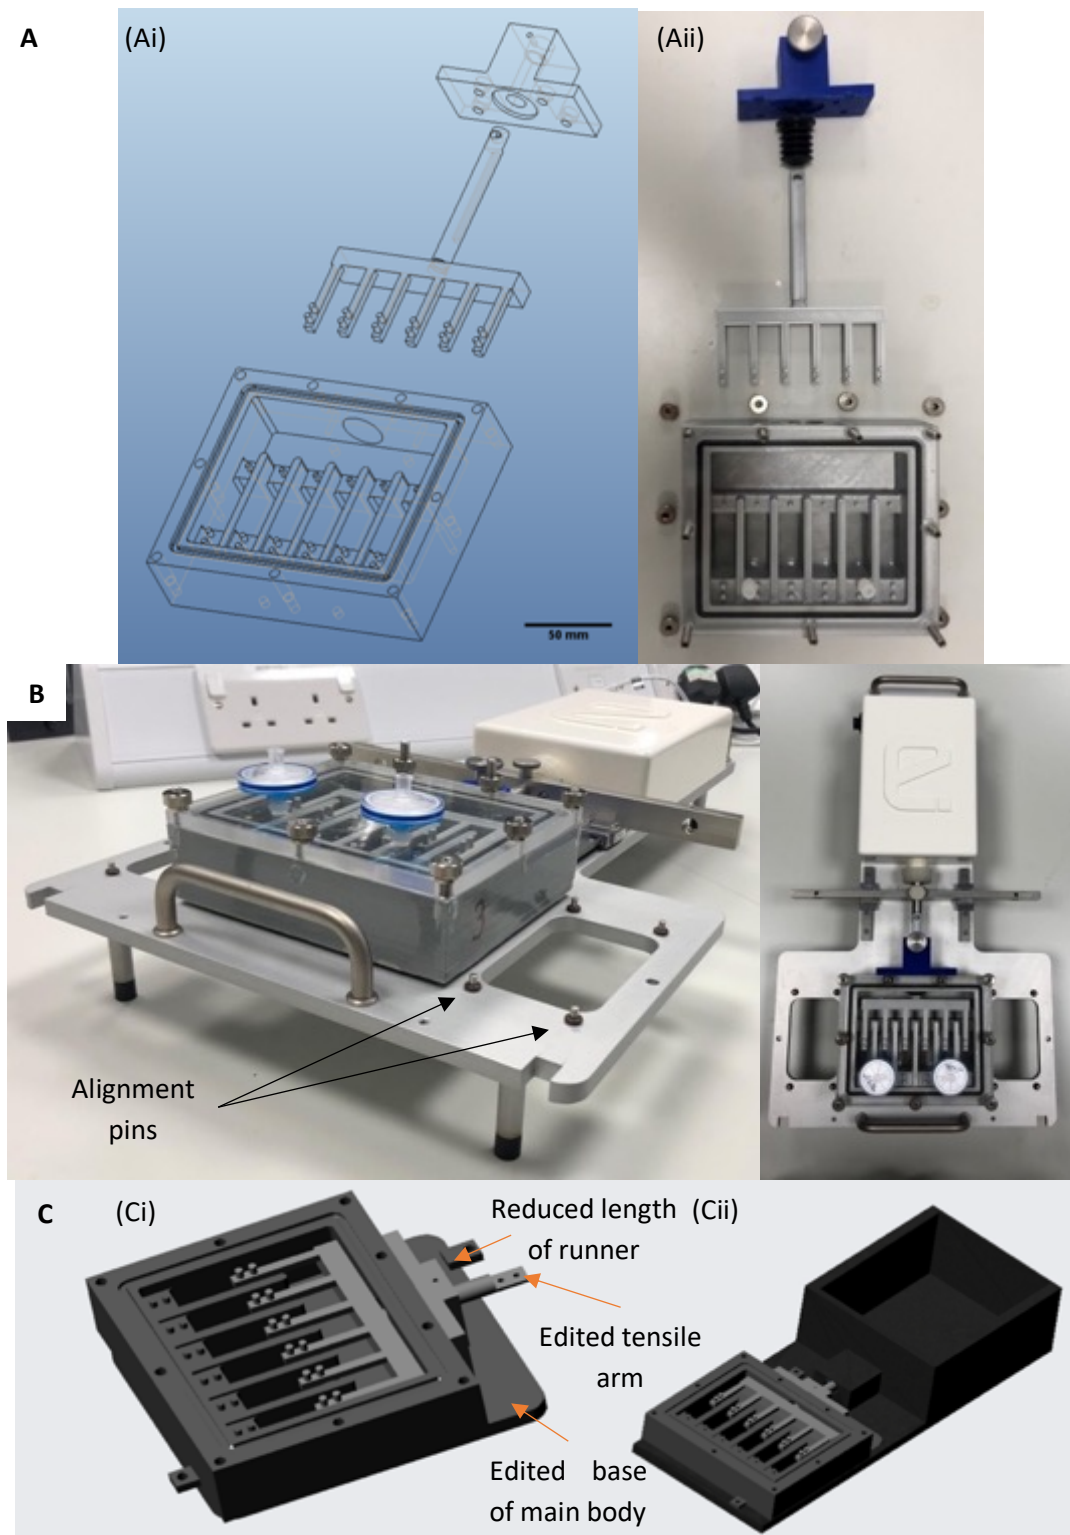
Final design of 3D printed culture chamber. (Ai) Separated CAD drawing of the final 3D printed culture chamber, scale bar is 50mm. (Aii) Manufactured 3D printed culture chamber, the main body, tensile arm and tensile arm runner were manufactured by 3D printing using PLA filament. (B) 3D printed culture chamber mount onto the EBERS TC-3 bioreactor. (Ci) CAD for 3D printed culture chamber adapted to the CellScale MCT6 bioreactor. (Cii) 3D printed culture chamber mounted onto the CellScale MCT6.
